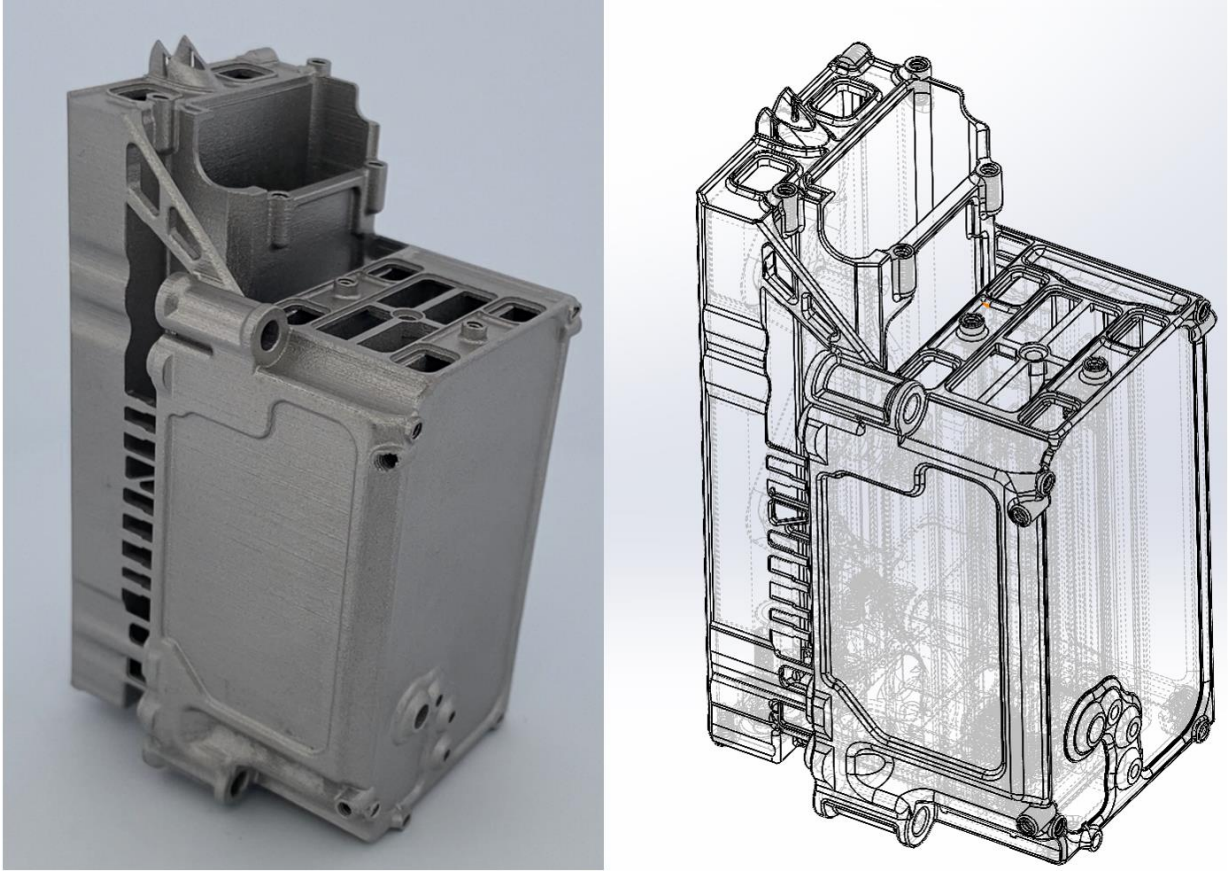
(Left) Picture of the Fluid Matter Exchanger, (right) CAD view of the Fluid Matter Exchanger showing the large amount of hidden internal features.
